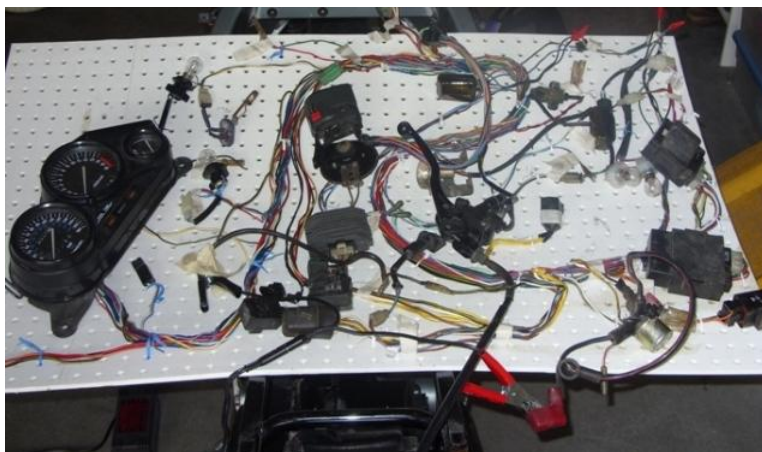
Motorcycle factory wiring harness unwrapped for testing and removal of unnecessary circuits
